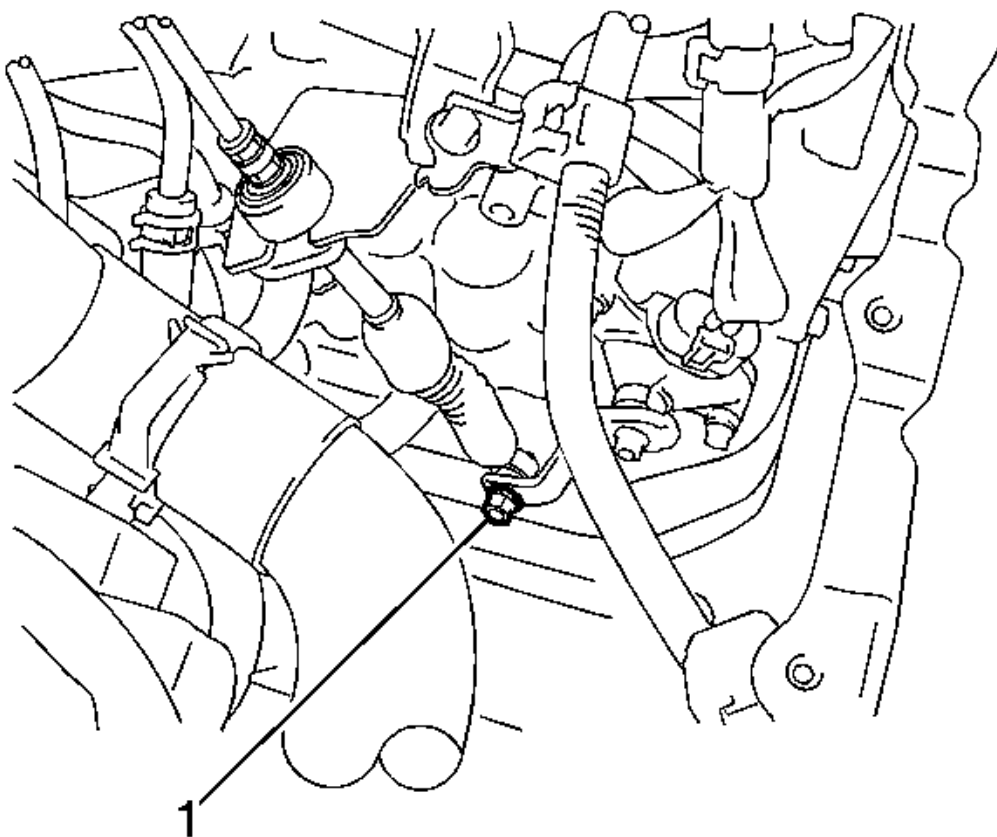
Identifying Automatic Transaxle Control Cable Assembly & Control Shaft Lever
